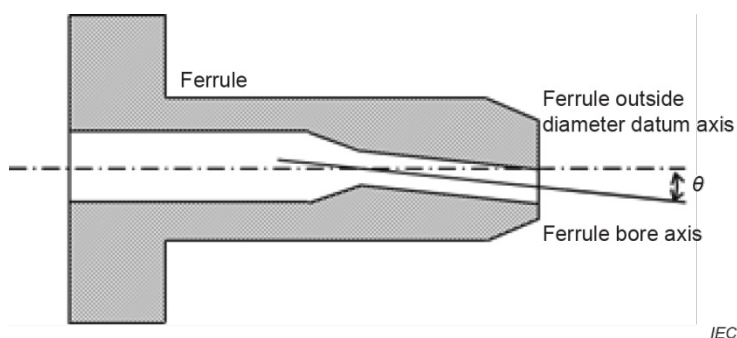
Angular misalignment between ferrule bore axis and ferrule outside diameter datum axis
